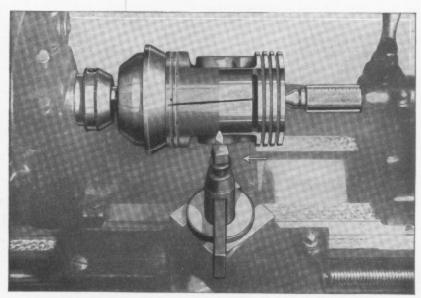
Finishing an Aluminum Alloy Semi-Machined Split Skirt Piston
